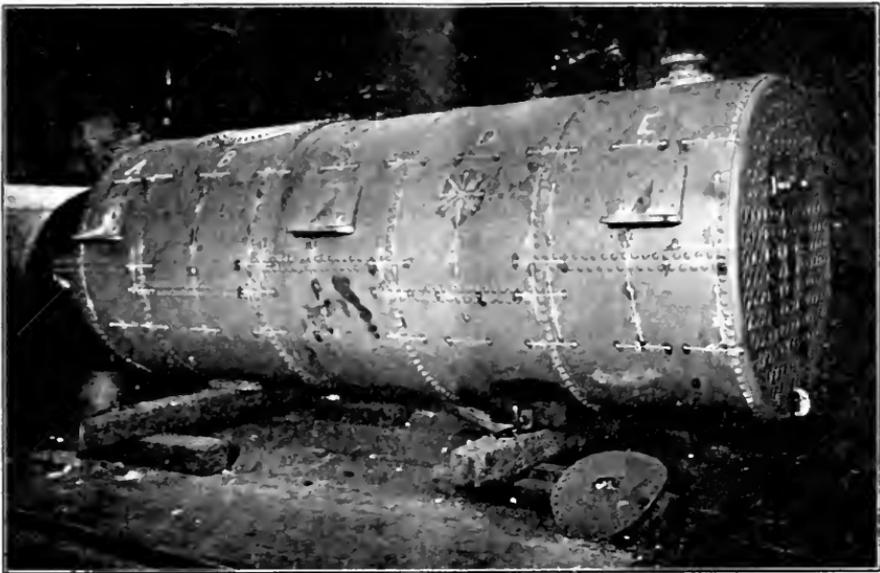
BOILER 4092 PRIOR TO THE TEST. NOTE THE 10-INCH GAGED LENGTHS.
